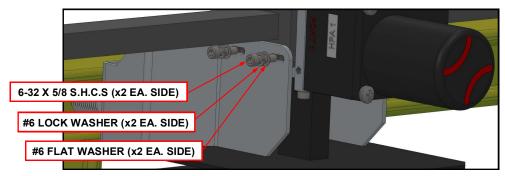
Switch Assembly Installation, Ku-Band (typical)
